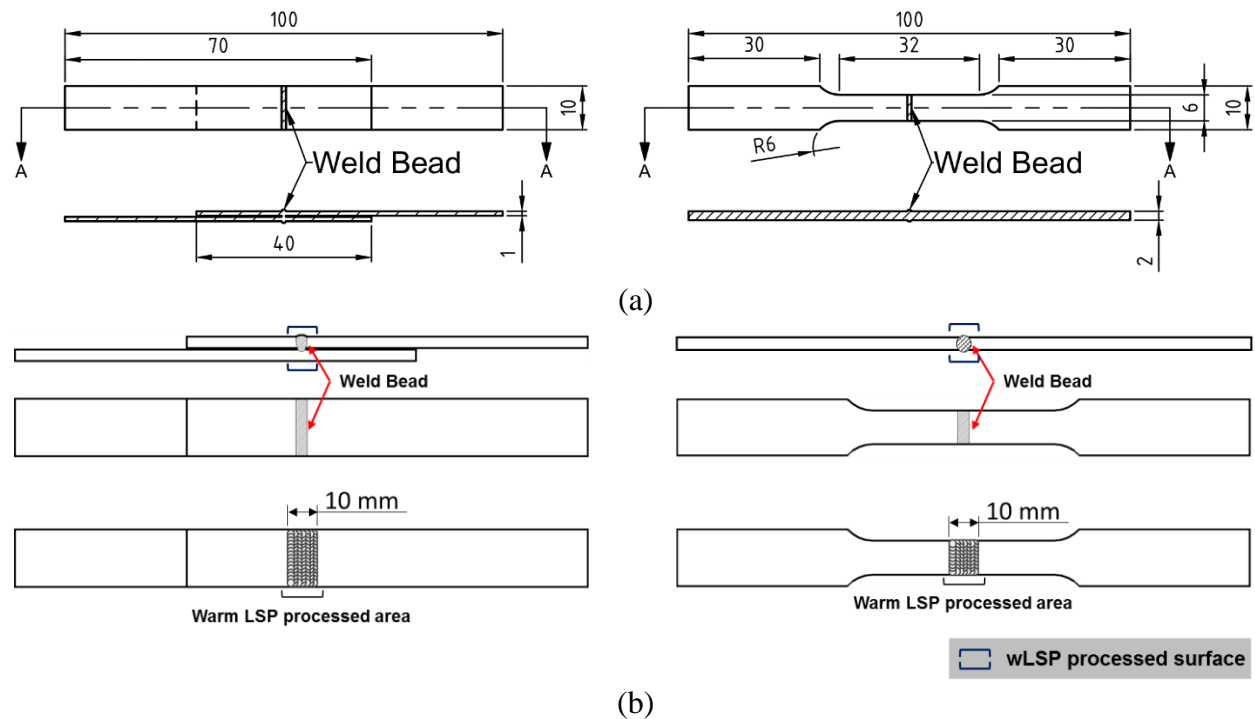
(a) Dimensions and (b) processing surfaces for wLSP of welded joints
